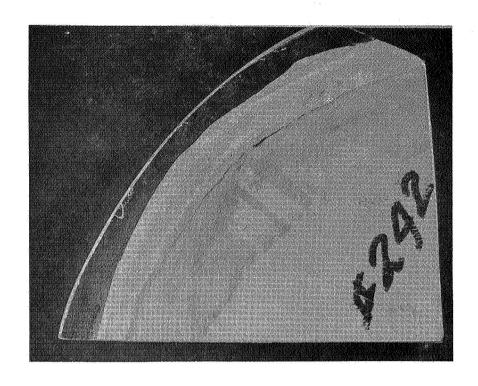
WELD SPECIMEN FROM TOOLING BOSS
